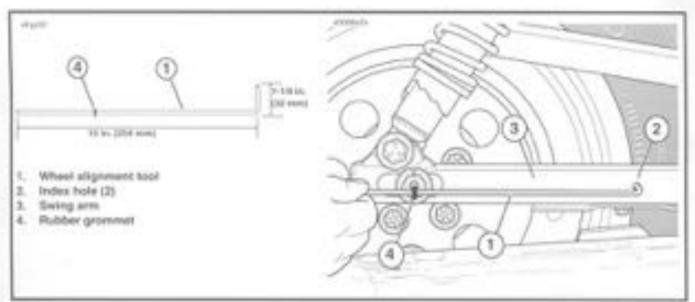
Checking Wheel Alignment Using Wheel Alignment Tool
